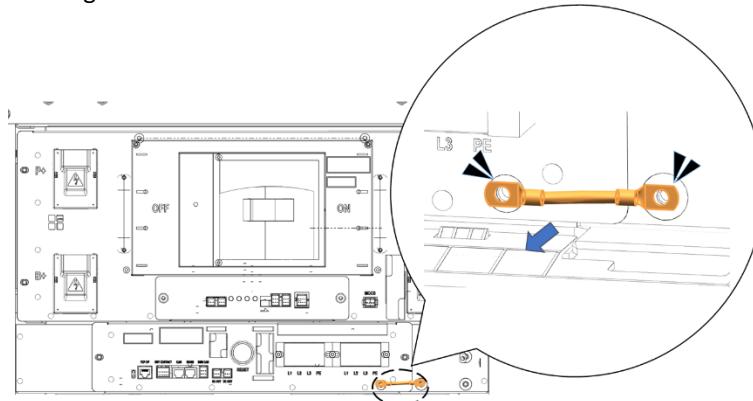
Unscrew SMPS Assembly Grounding Cable
